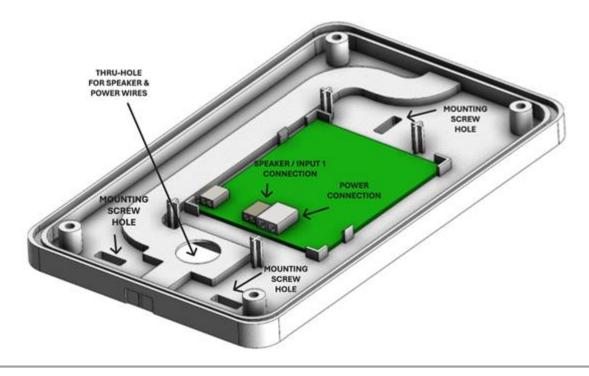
Key physical features and printed circuit board assembly (PCBA) connectors of the AHLP-1.
